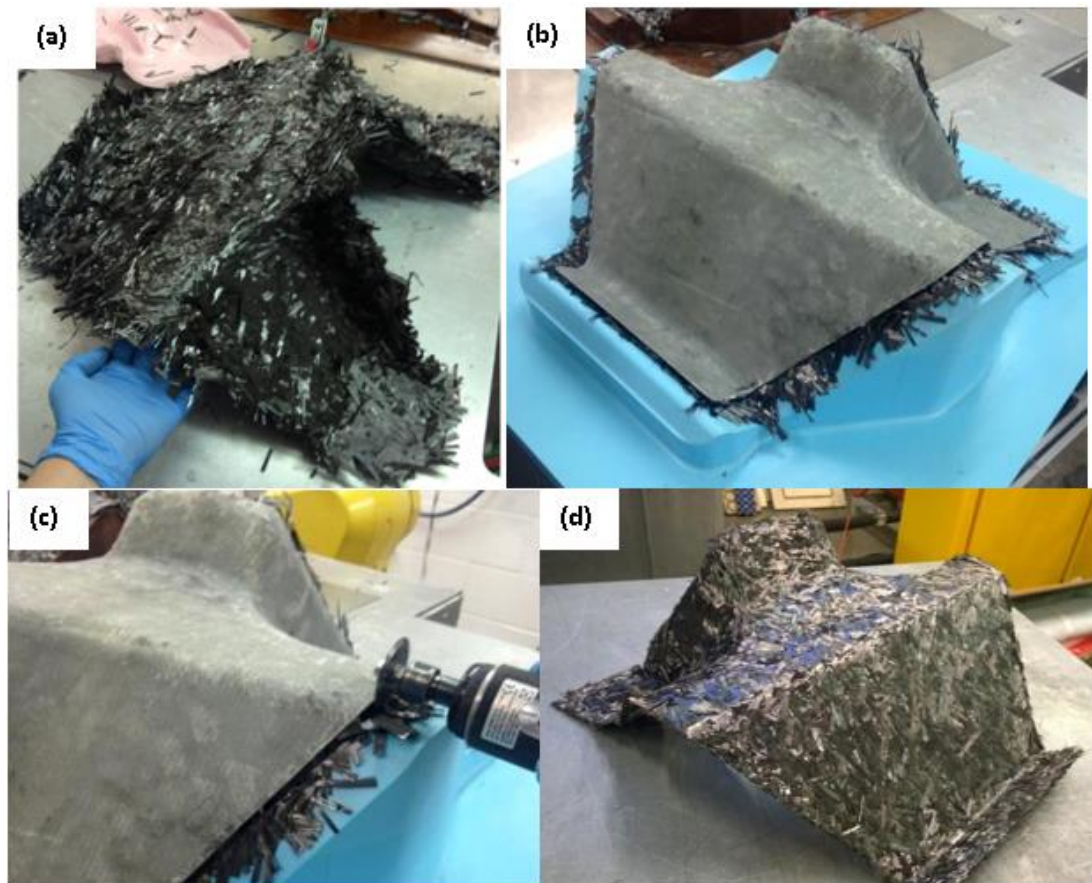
T-shirt preform trimming process: (a) Raw preform; (b) Rigid shell placed on; (c) Rotor blade trimming preform edges; (d) Trimmed preform
